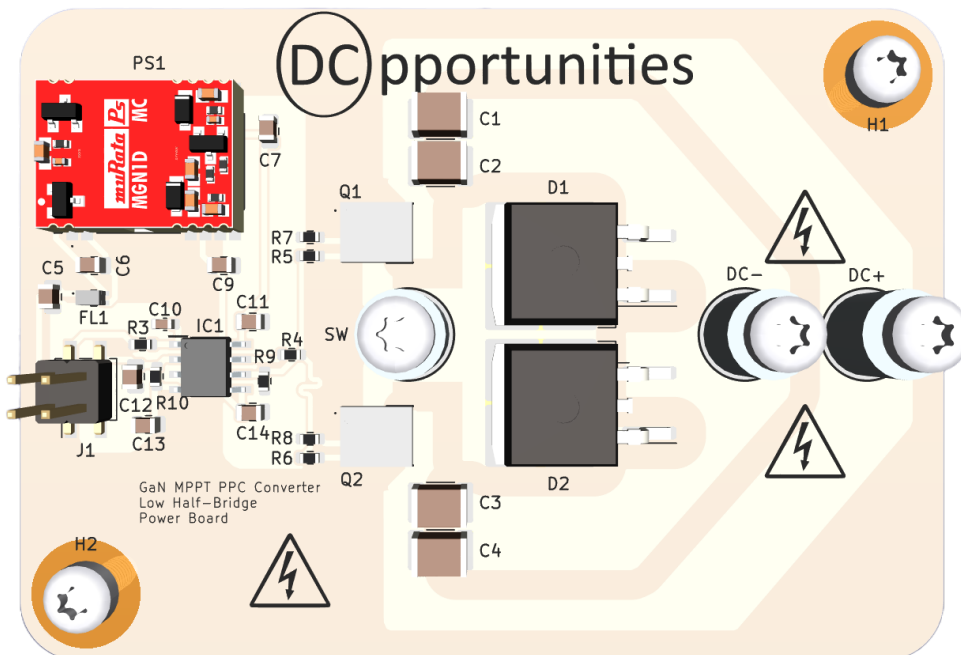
Single-layer aluminium low half-bridge board 3D model designed in KiCad.
